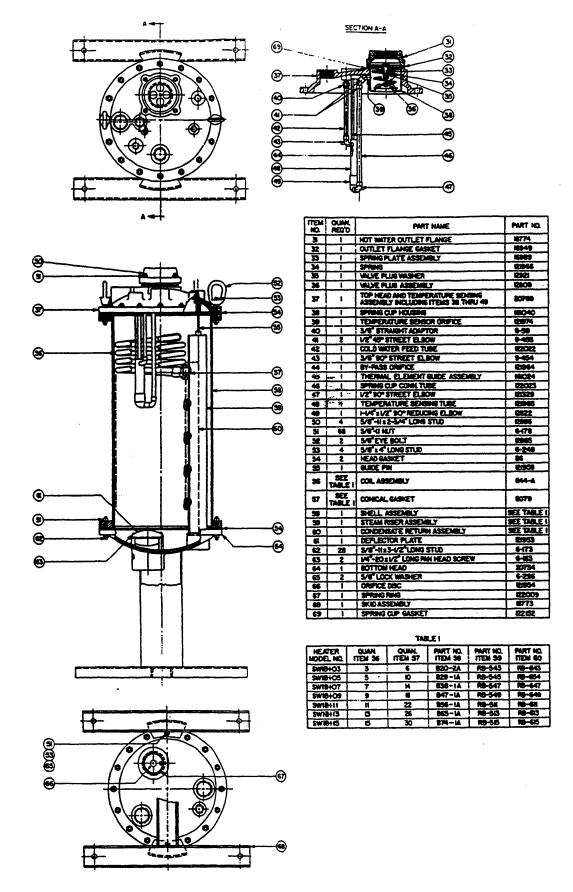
AERCO Model SWIB-PLUS Heat Exchanger -- Assembly and Parts List
